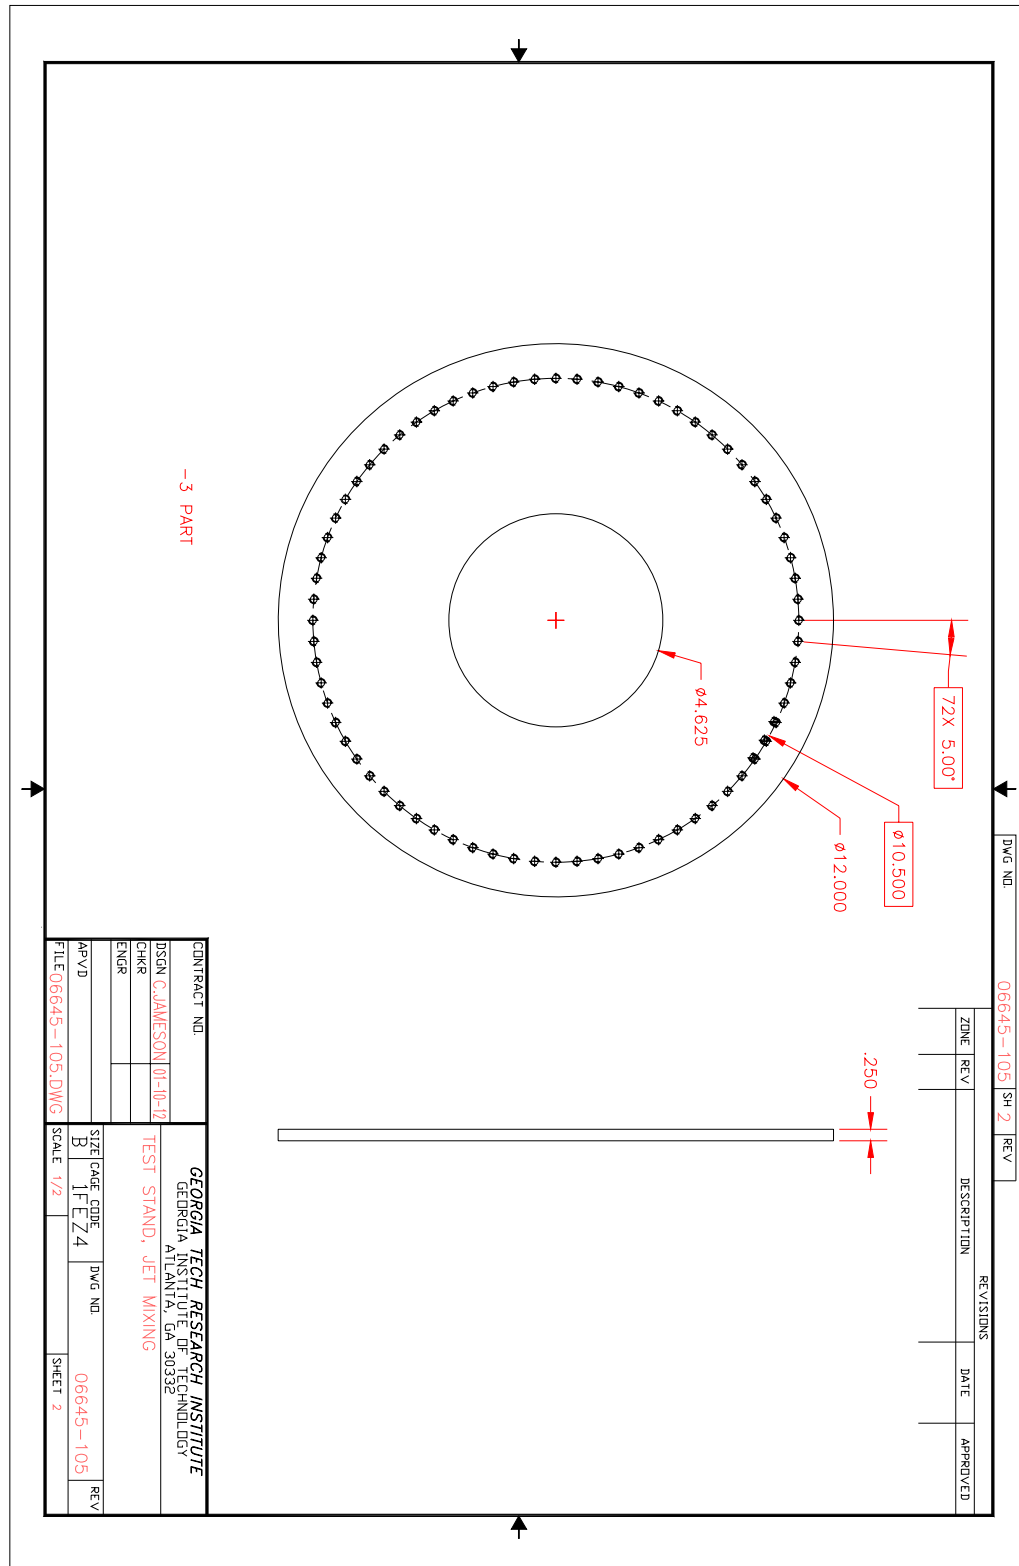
Small Scale Jet, Actuator Test Stand Mounting Ring
